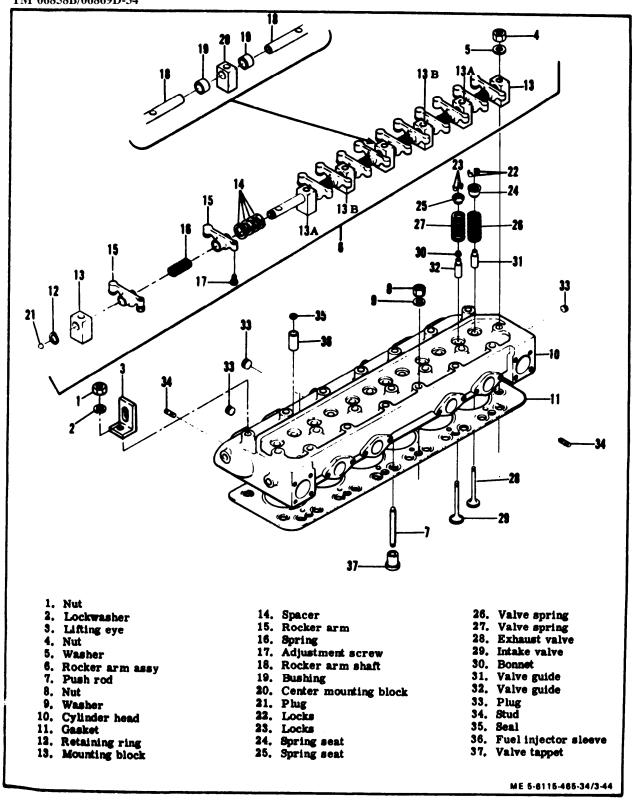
Cylinder Head and Rocker Arm Assembly, Exloded View
